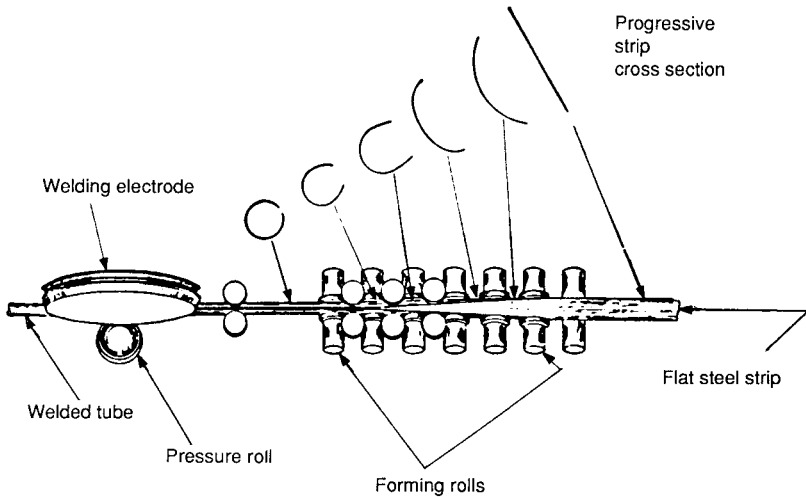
Electric resistance welded pipe process.
